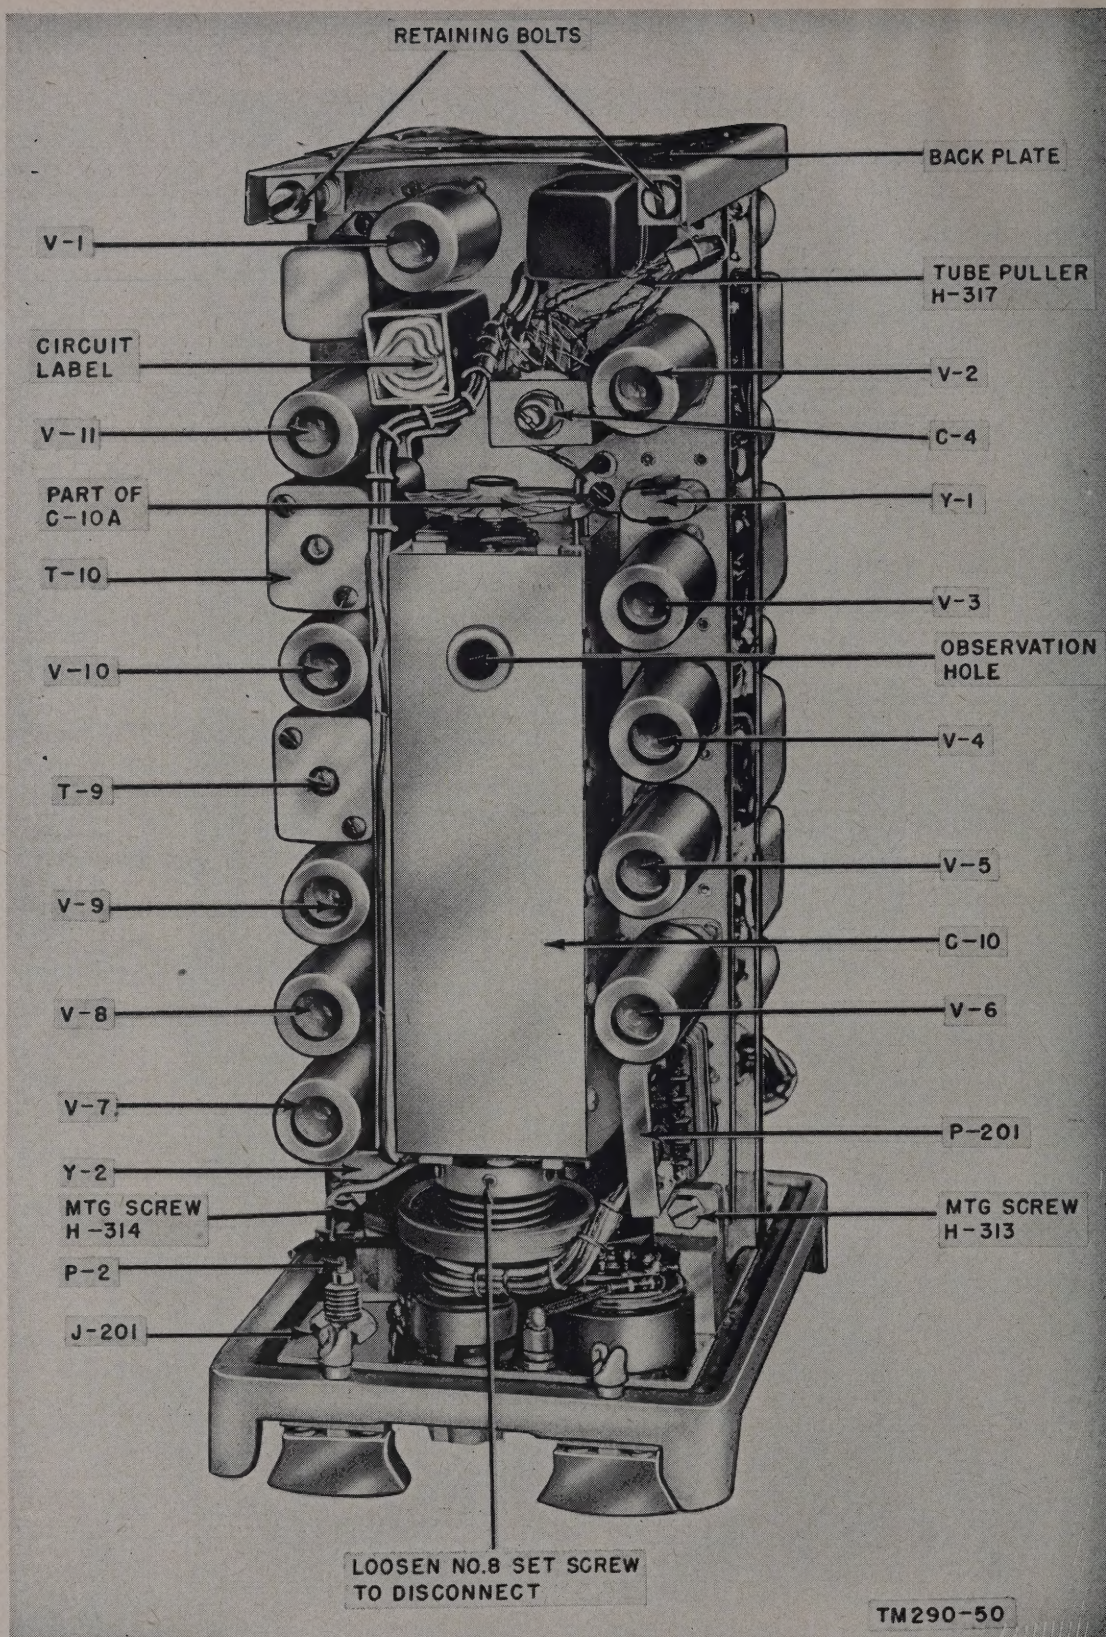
Receiver-Transmitter RT-70/GRC, view of r-f chassis.
